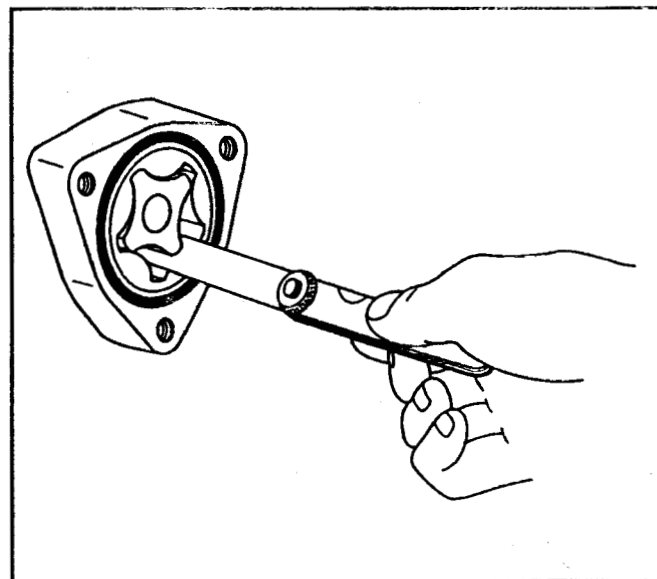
MEASURING ROTOR LOBE CLEARANCE
